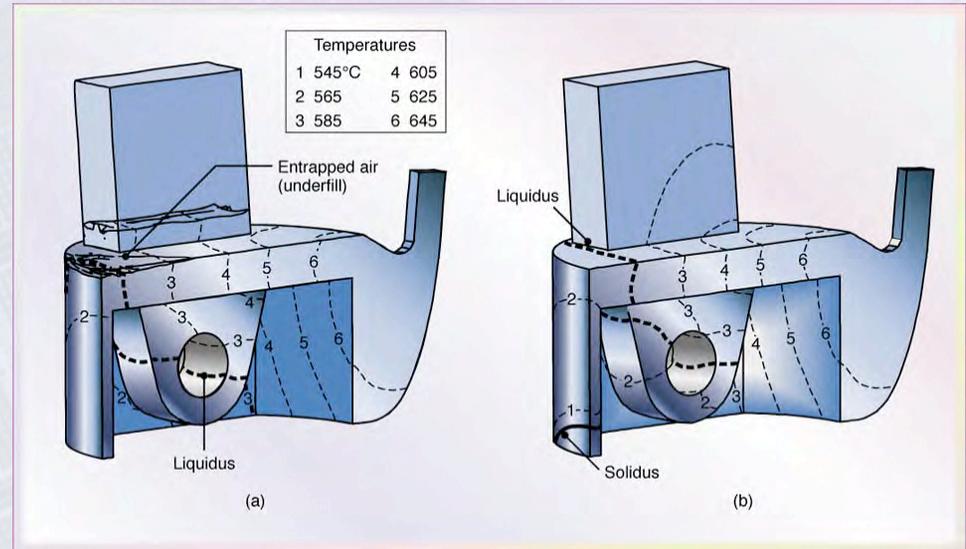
Simulation of mold filling and solidification. (a) 3.7 seconds after start of pour. Note that the mushy zone has been established before the mold is filled completely. (b) Using a vent in the mold for removal of entrapped air, 5 seconds after pour.
